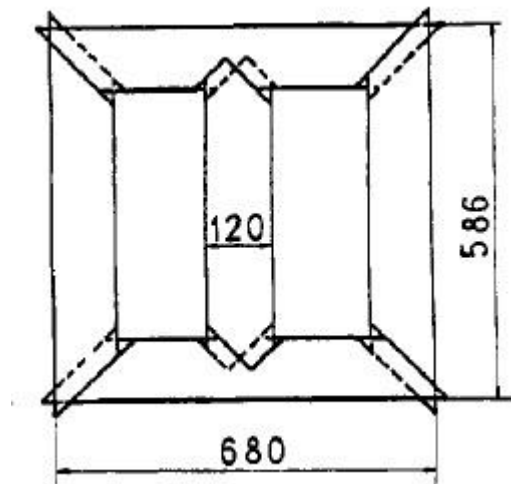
The investigated 3-phase, 3-limb transformer core with of V-45° T-joint design [58].
